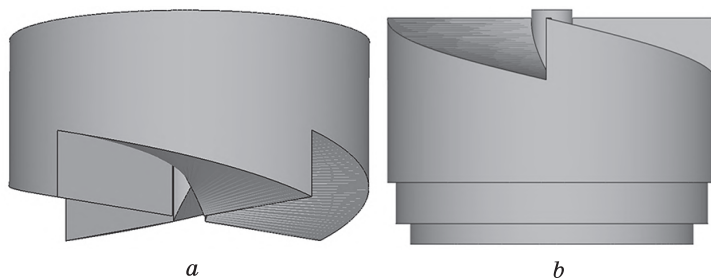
Tool design: upper striker model (a) and lower striker model (b) [63]
